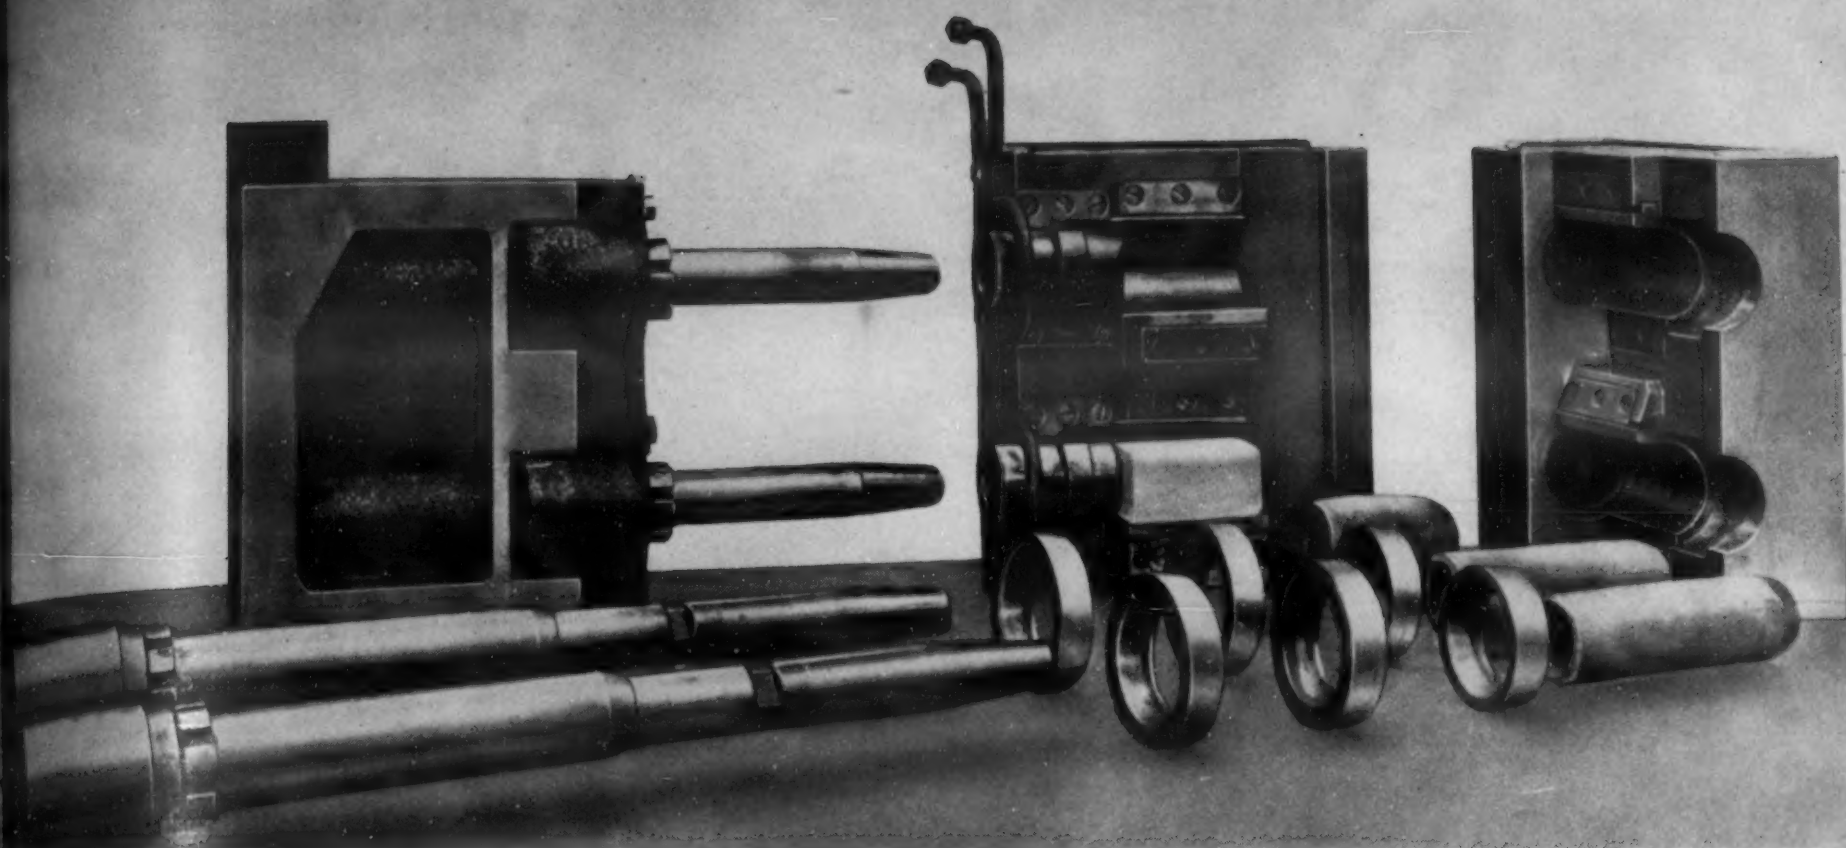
Piercing and drawing dies for horizontal Baldwin-Omes forging machine.
